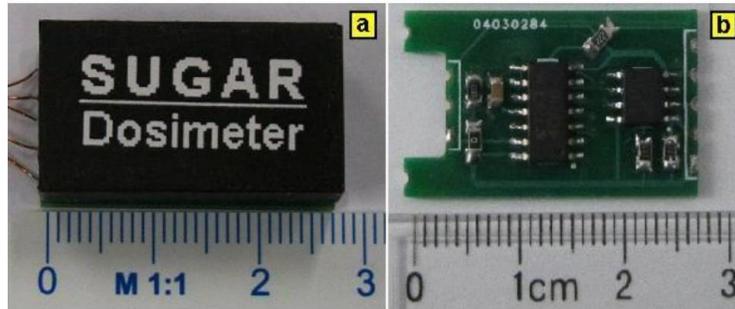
10 (a) Showing the dosimeter assembled on the PCB (b) The PCB with the SMD components
